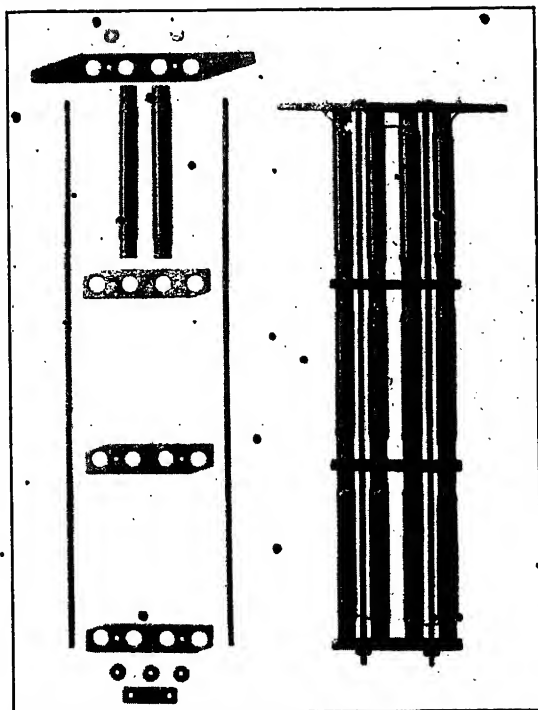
PARTS AND ASSEMBLY OF A 10,000-OHM RESISTOR SECTION
